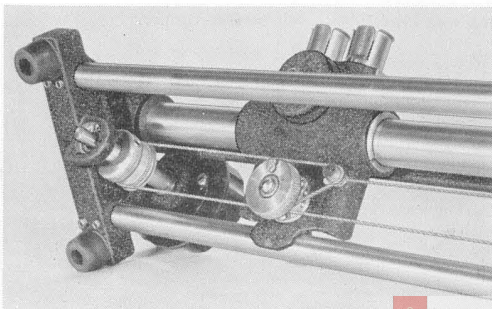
View of the drive mechanism showing the driving drum, ratchet take-up mechanism and nylon cord.
